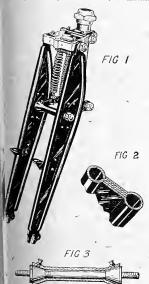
The Arden pressed steel fork. Fig. 2.—Section of fork side. Fig. 3.—Section of coned bearings.
